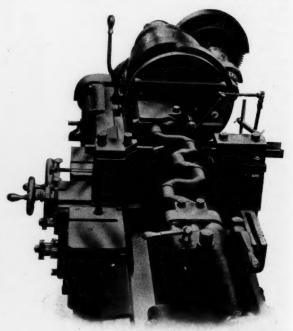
The Arrangement of the Tools for Cutting the Fillets and Turning the Crank-pins
